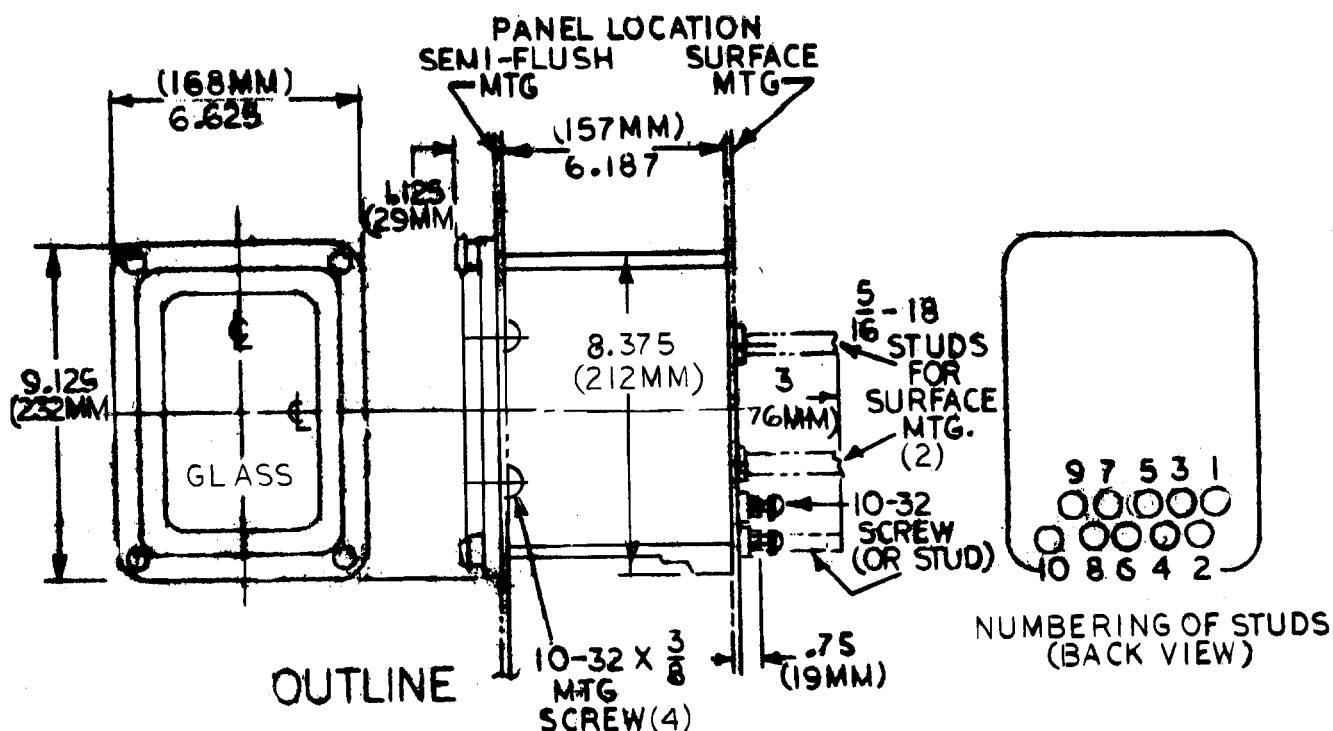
(6209271-5) Outline and Panel Drilling Dimensions for Relay Types HGA18E and HGA18F
